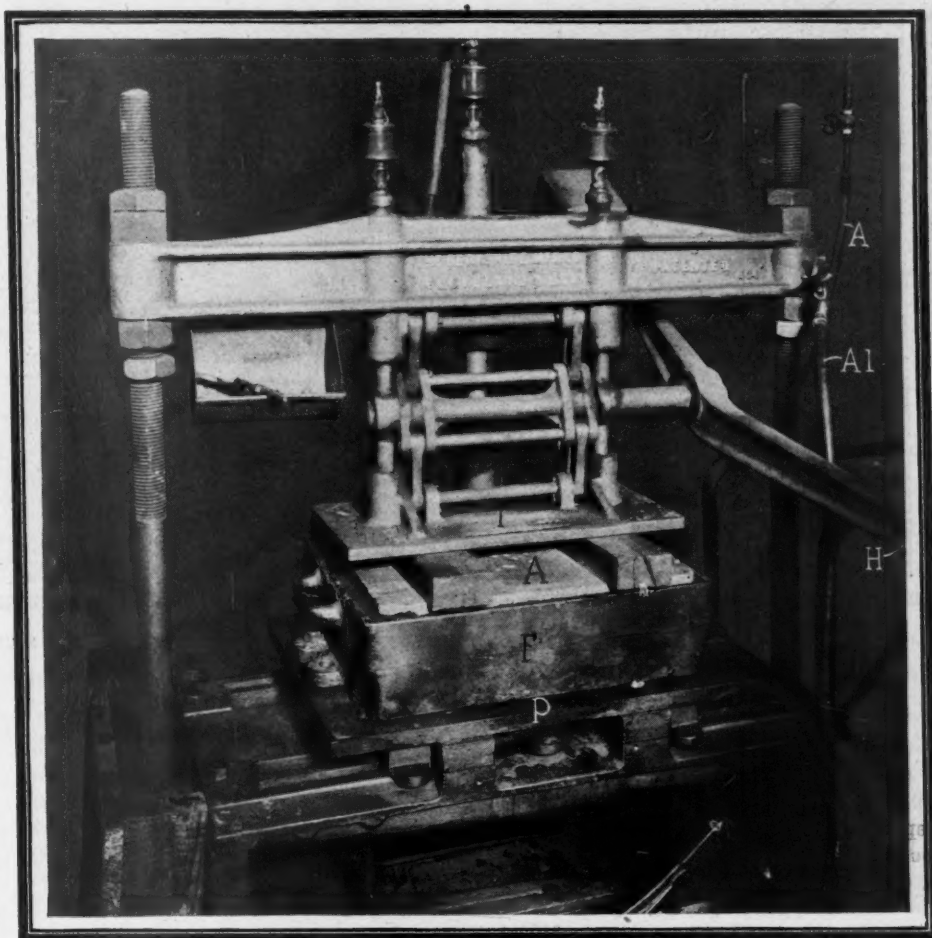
MOULDING MACHINE PRESSING THE SAND IN THE FLASK
